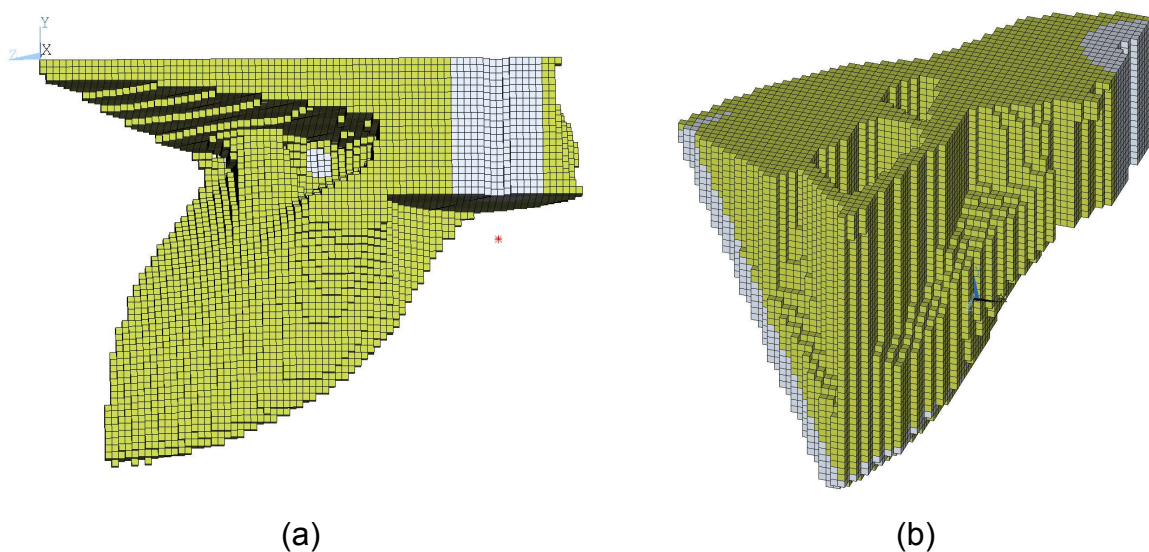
Isometric view of TO result: a) without any manufacturing constraints, b) with casting constraints
